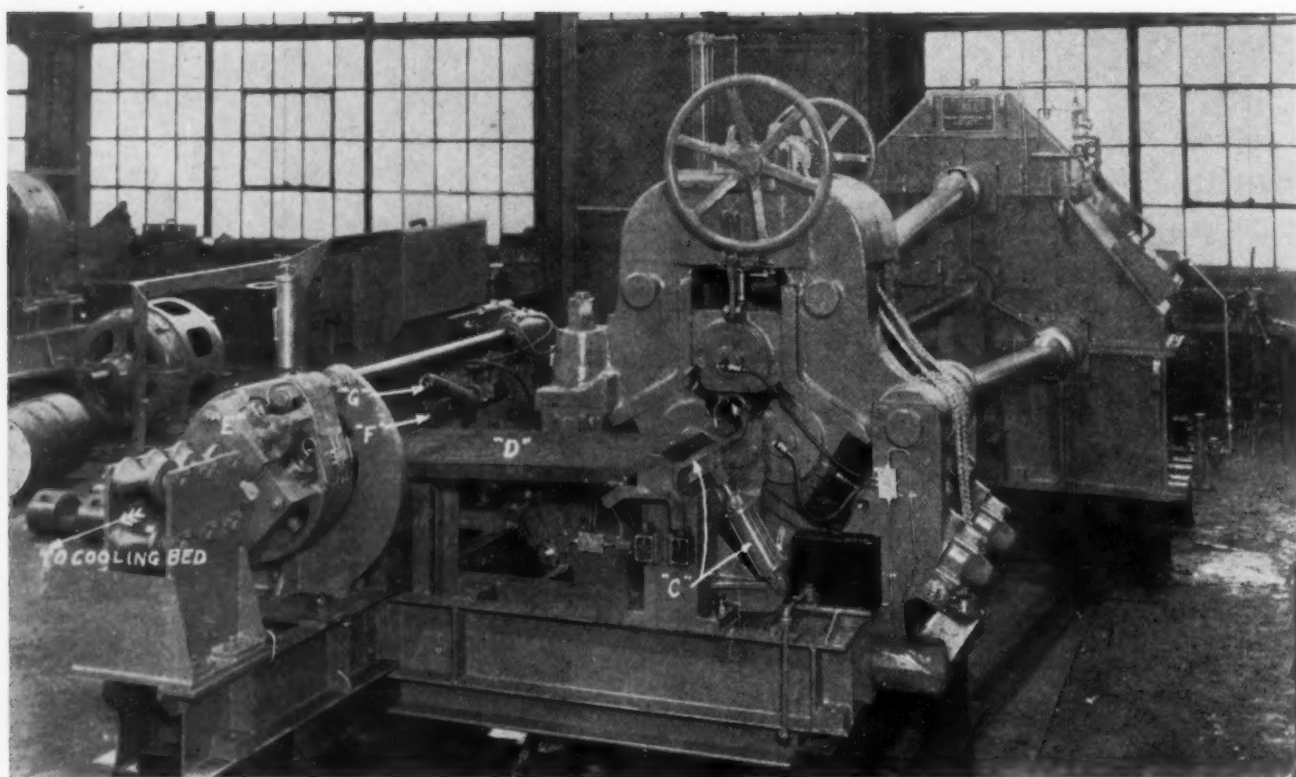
DISCHARGE END OF CROSS ROLLS AND SIZING ASSEMBLY
